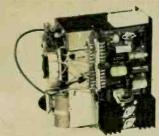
370's high-voltage assembly comes completely built. Tenth plug-in board, horizontal output, is at top, right.
